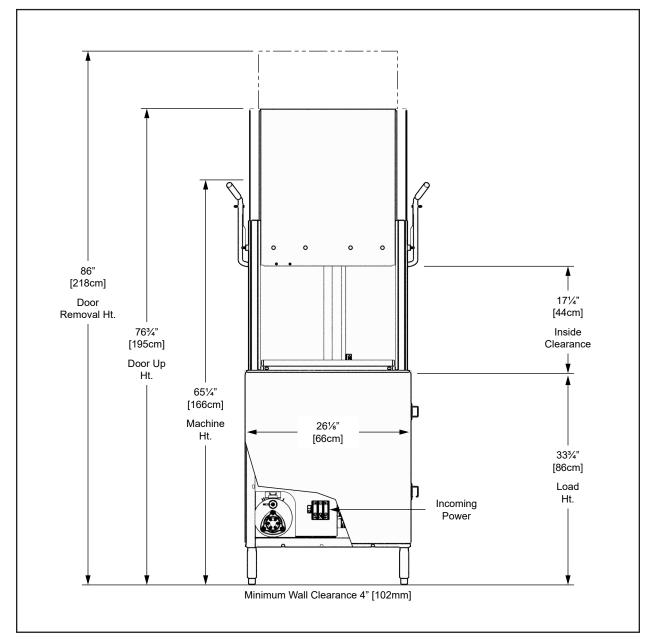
Dishwasher Dimensions in Inches and Centimeters
